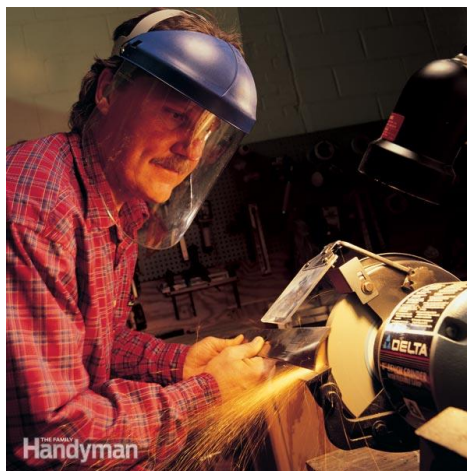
Sharpening a Lawn Mower Blade with a Bench Grinder. [2]
